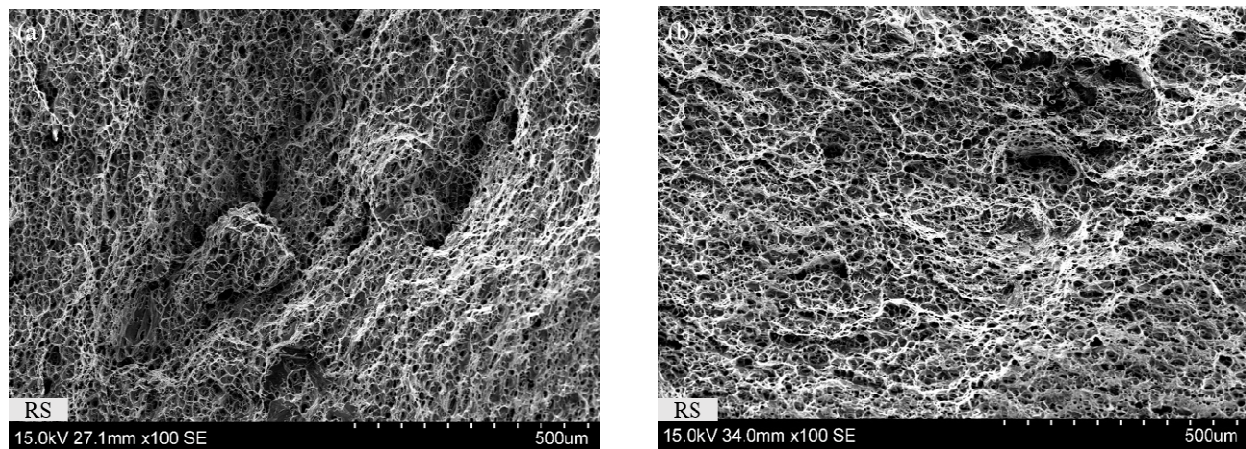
Fracture surfaces of FSW-10 sample showing failure in the HAZ of RS.
